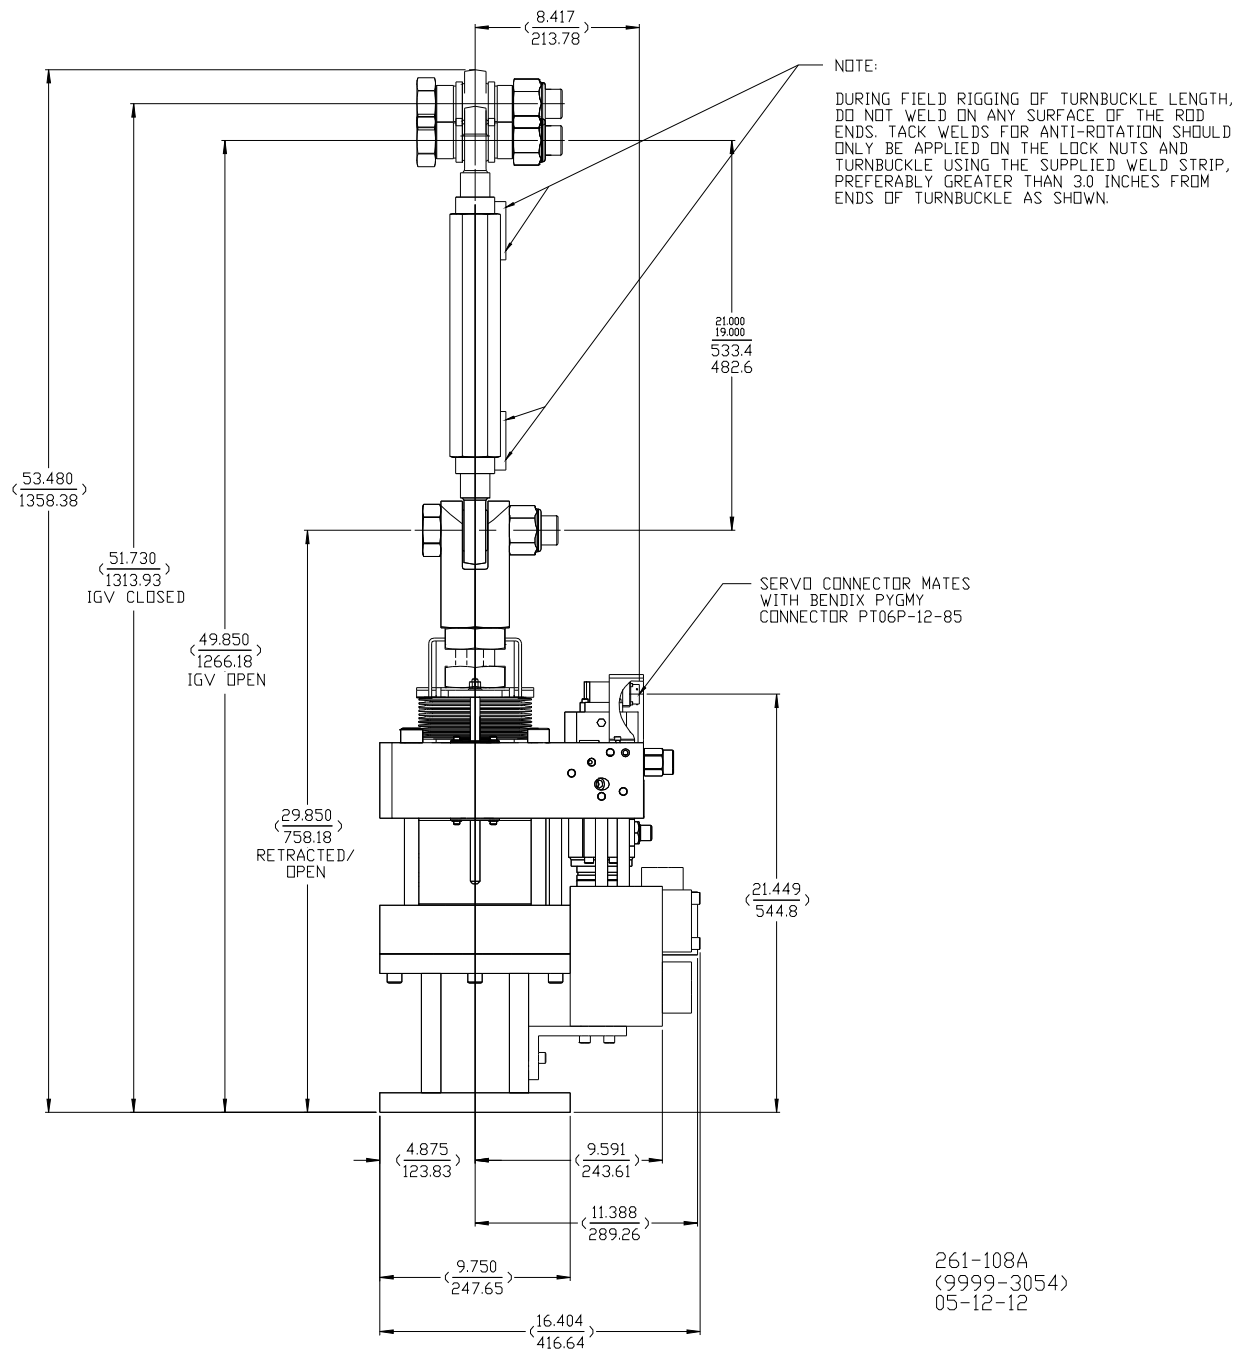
7E IGV Actuator with Hydraulic Trip (left side view)
